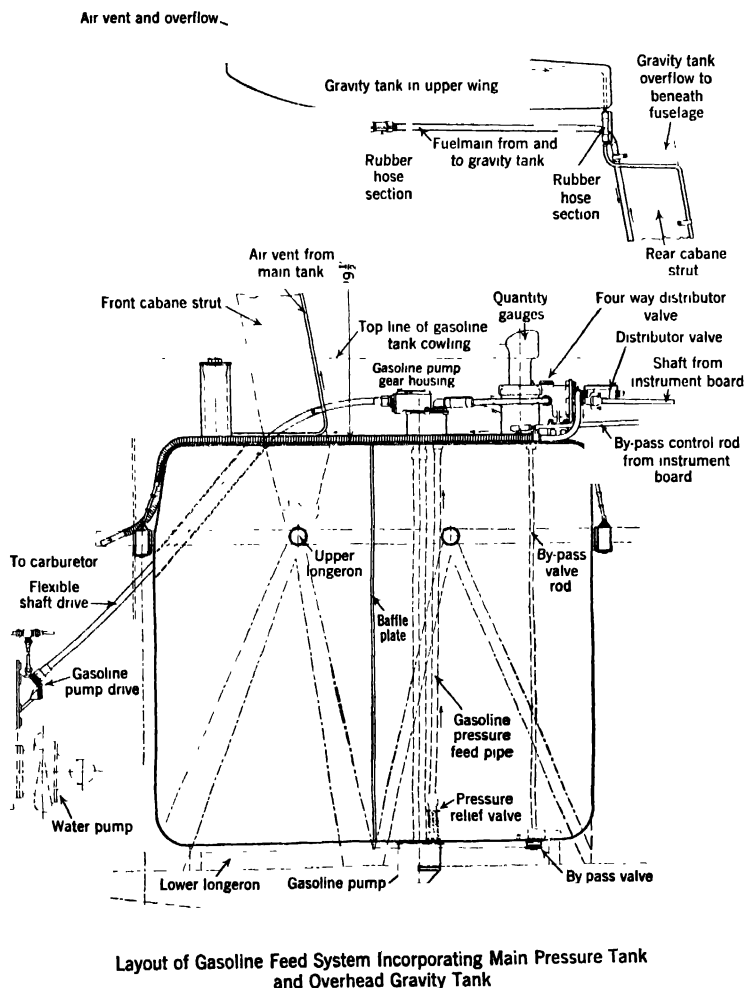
A.—Layout of McCook Field DH9 Gasoline System Which Used Two Vane Type Pumps at Bottom of Main Fuel Tank Driven by Flexible Shaft Connection with the Engine.
